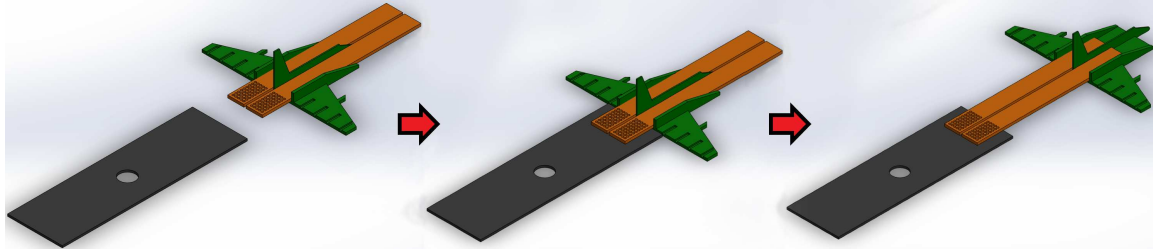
Multiple stages of copper tape mounting using the assistance tool. The tool is docked to the polymer matrix, the perforated copper region is held in place and the tool gently removed. This occurs prior to soldering, which completely secures the tape onto the polymer.
